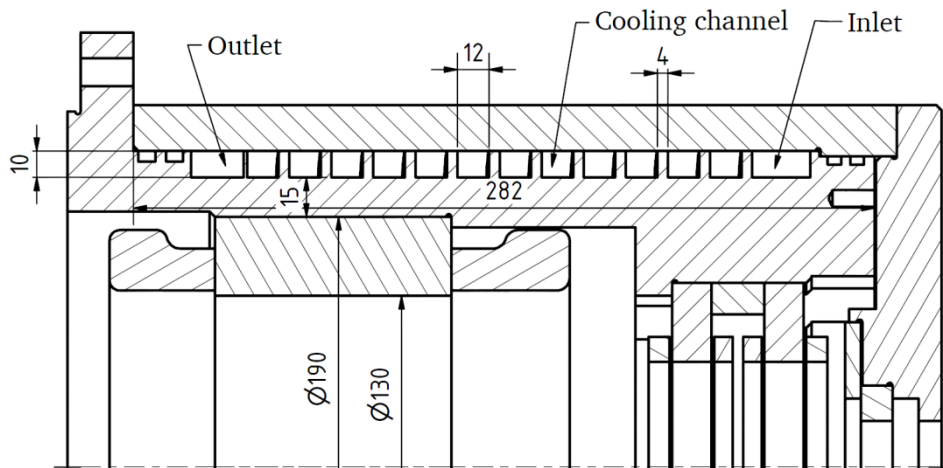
Section view of the cooling channel (dimensions in mm)
